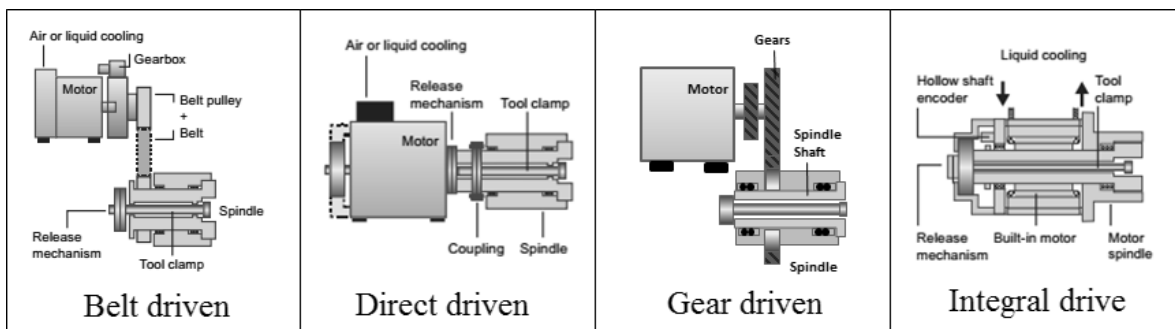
Transmission systems for spindle in machine tools. Adapted [Courtesy: Siemens]
